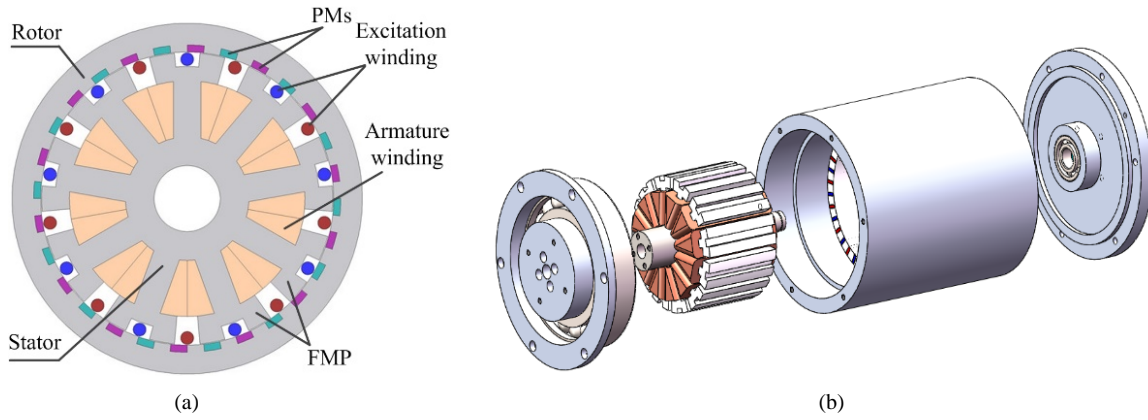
Proposed HEFMM. (a) Machine topology. (b) Exploded view.
